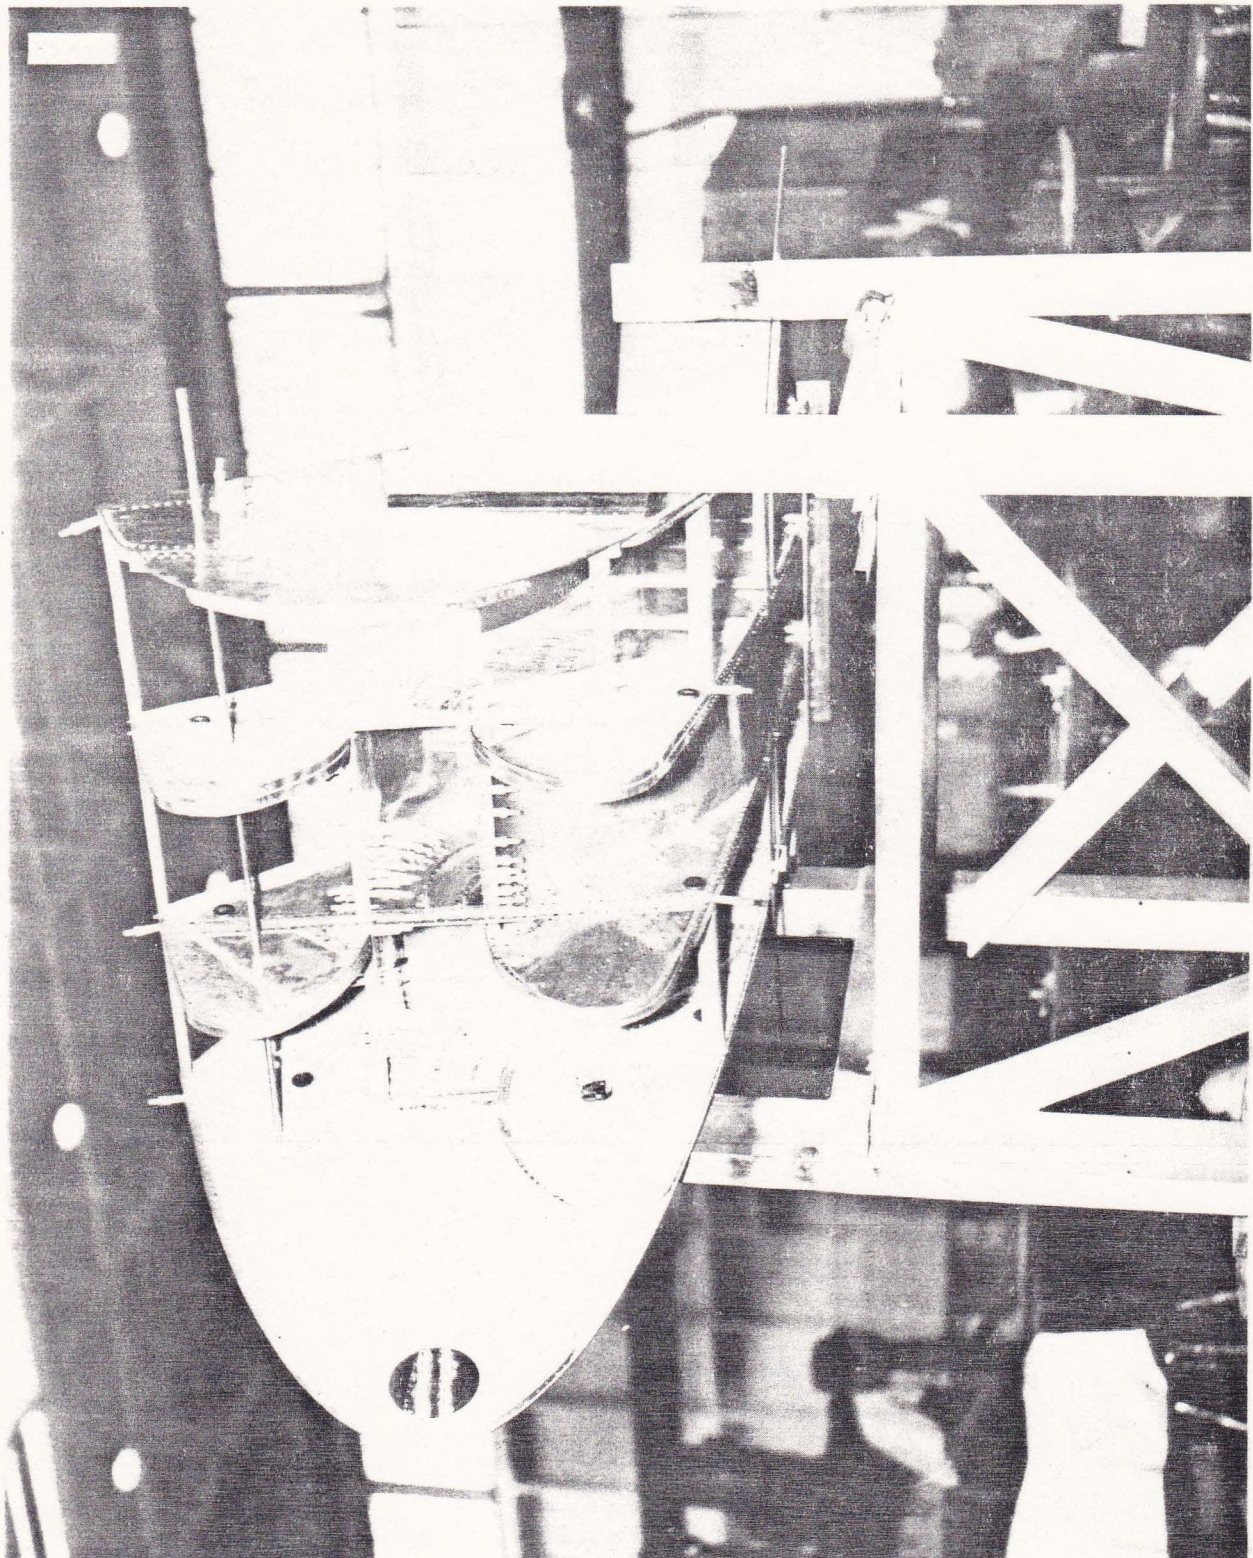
TEST SEGMENT IN COURSE OF ASSEMBLY
